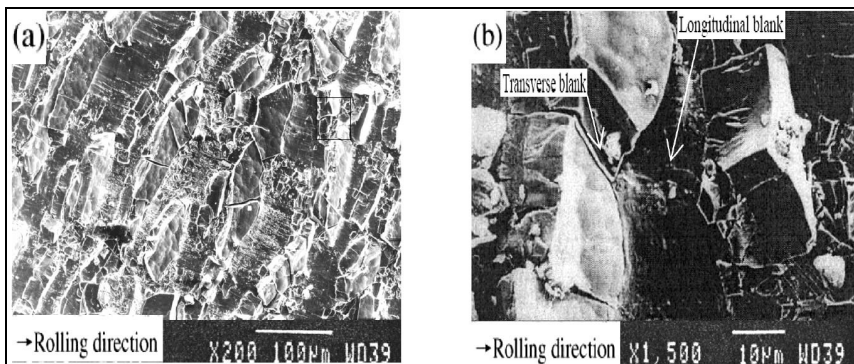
Typical fracture surface of the sheet composite of the specimen shown in Fig. 8c: (a) showing fragmented chromium layers on the steel surface; (b) higher magnification of (a)
